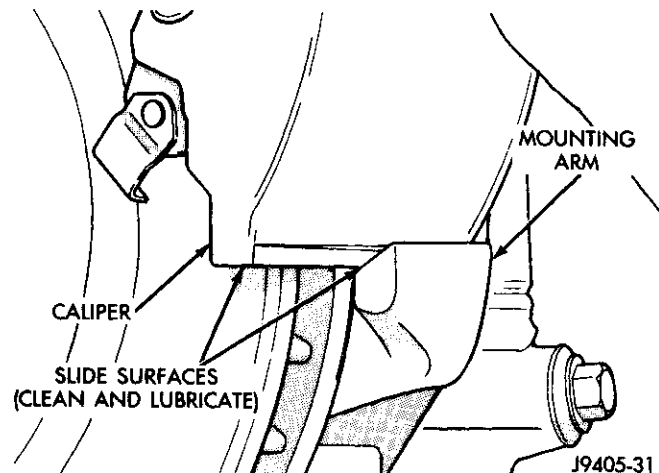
Caliper And Steering Knuckle Slide Surfaces
